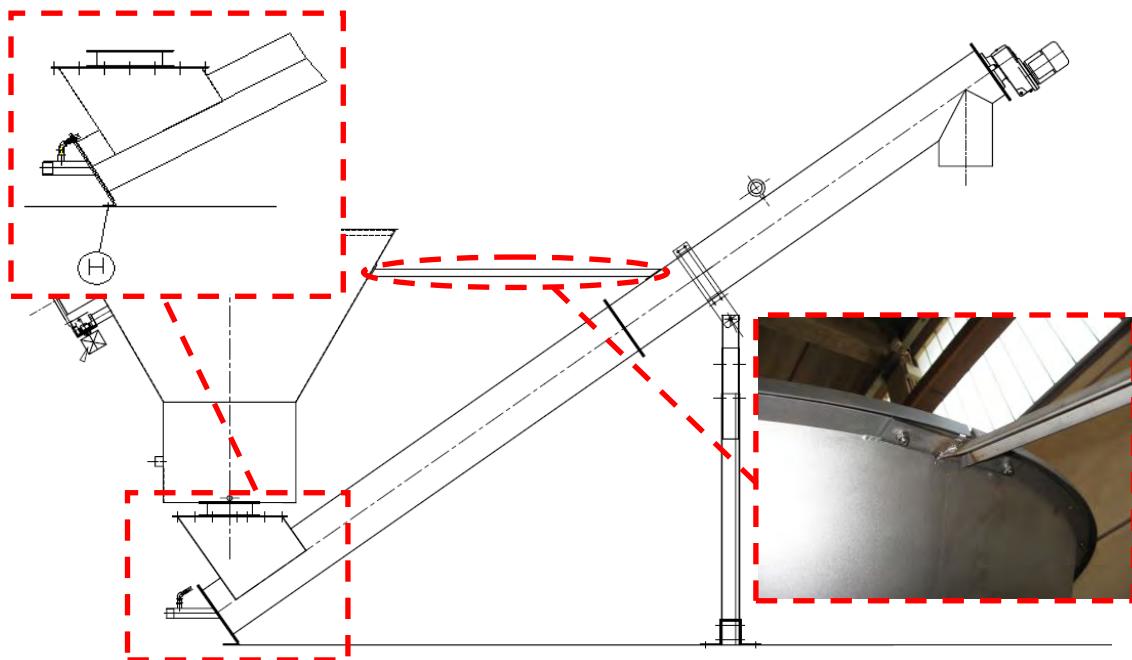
Installation Phase 4 reference diagram showing the screw floor and horizontal strut connections.
